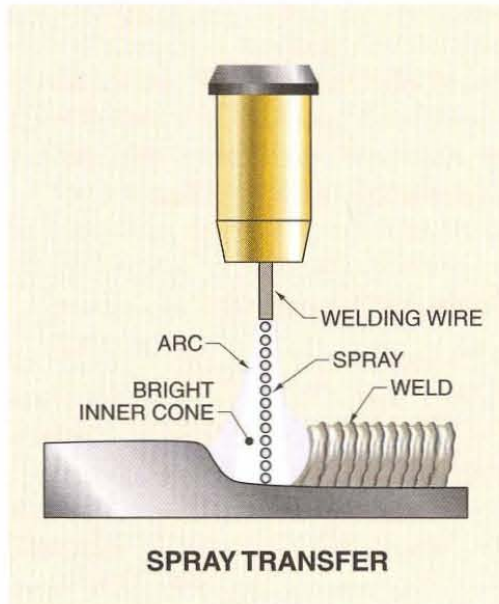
Spray transfer occurs when very fine droplets of welding wire are projected through the arc to the workpiece.
